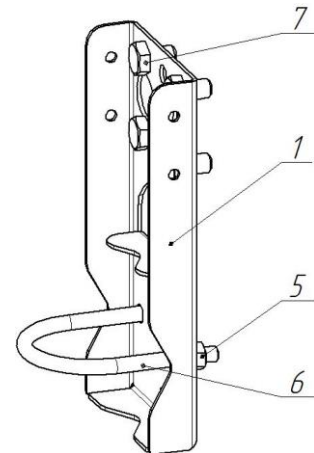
Stainless horizontal bracket. Mounting kit type 2
